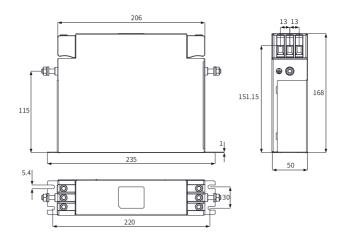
Filter dimensions (FN3288-40-33) (unit: mm)
